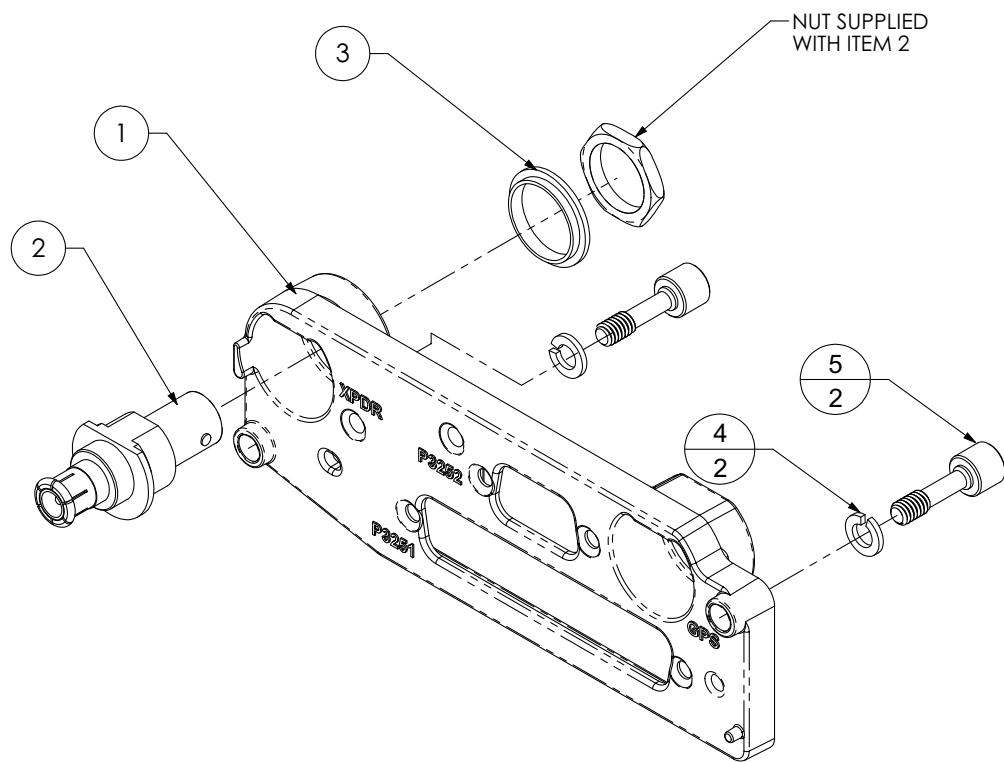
GTX 3X5 with GPS Backplate Assembly
